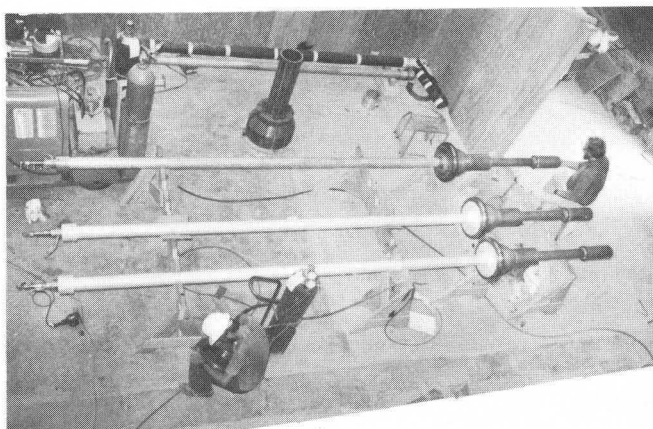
D  e stem inner conductors in assembly area being fitted for installation. The enlargement of the stem diameter accommodates the insulator, which provides rigid support close to the dee.
